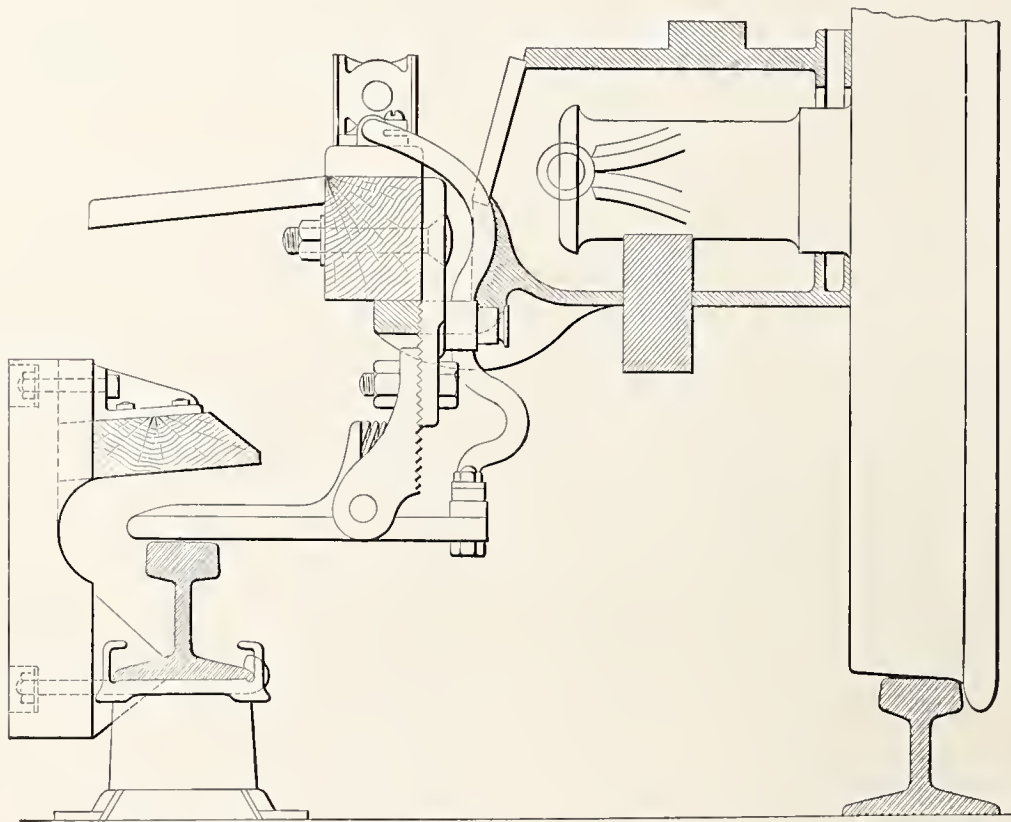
DETAIL VIEW OF CONTACT RAIL AND SHOE SHOWN IN FIG. 2
